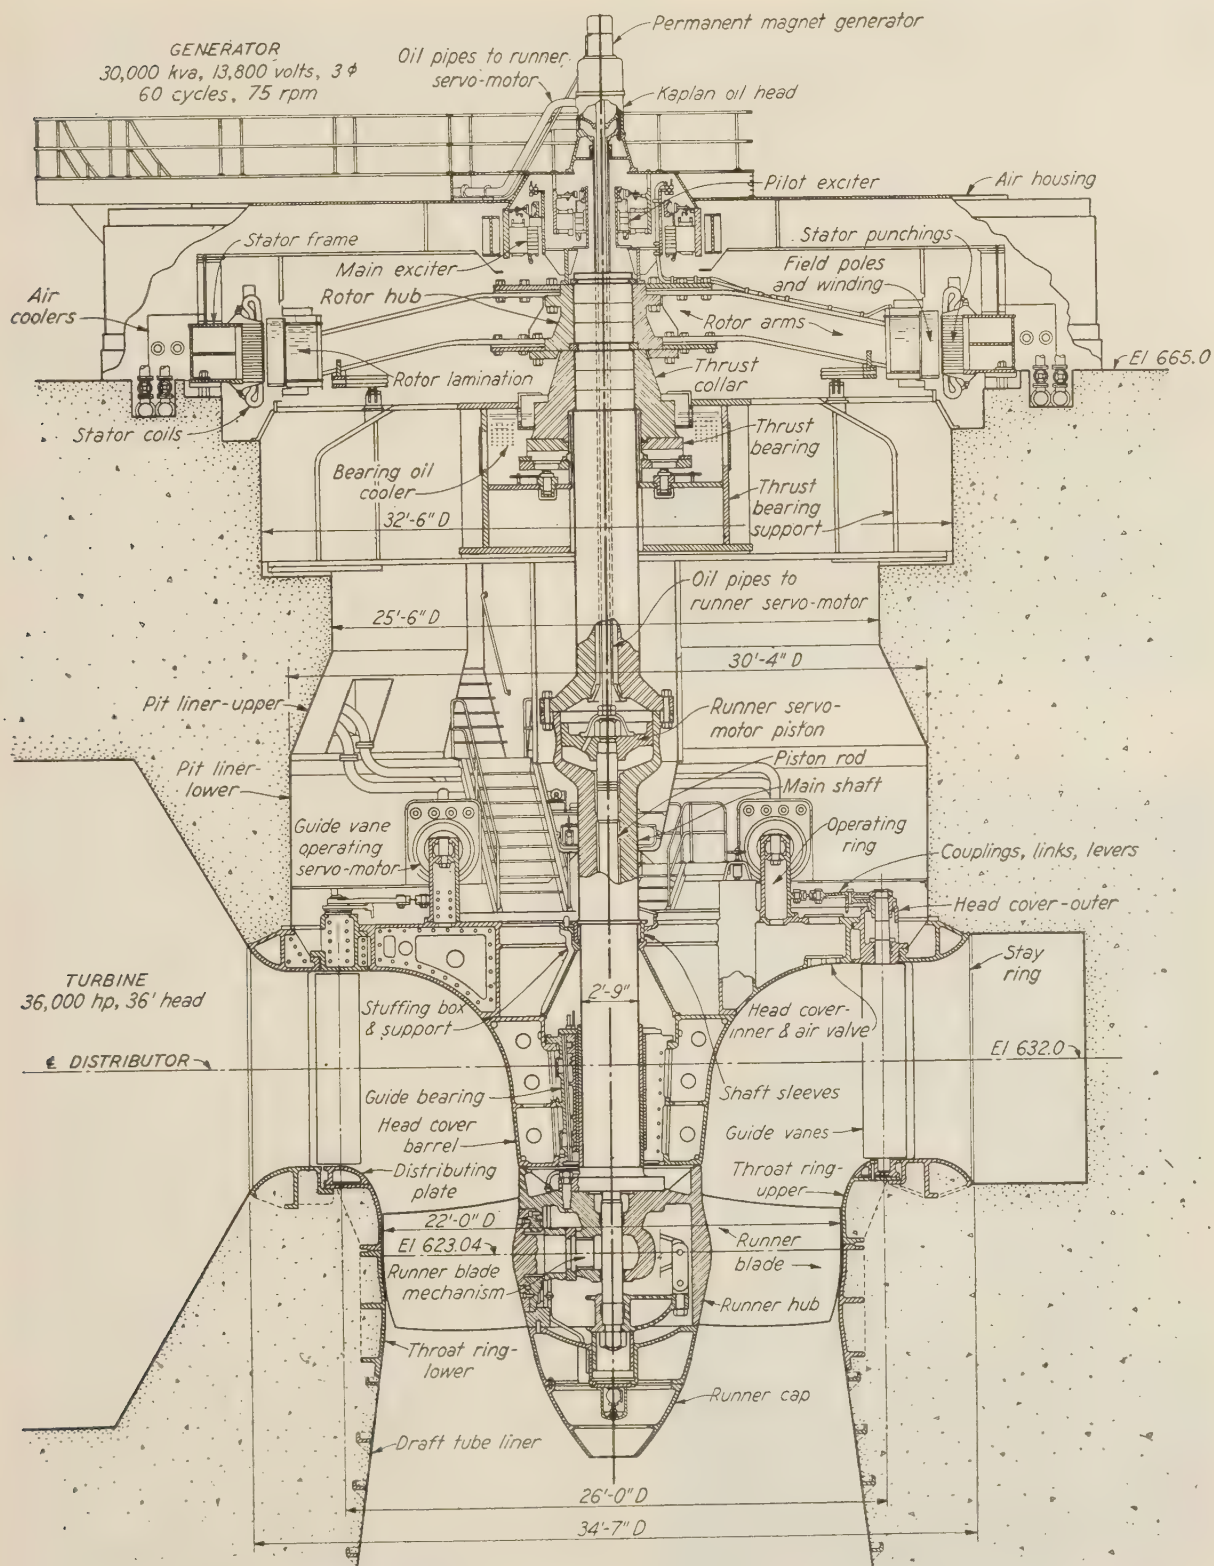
CROSS SECTION OF CHICKAMAUGA TURBINE
